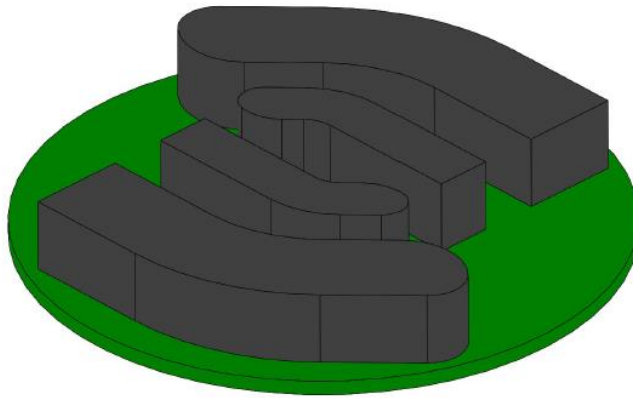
Drawings of the final magnets produced by one pressed disk
